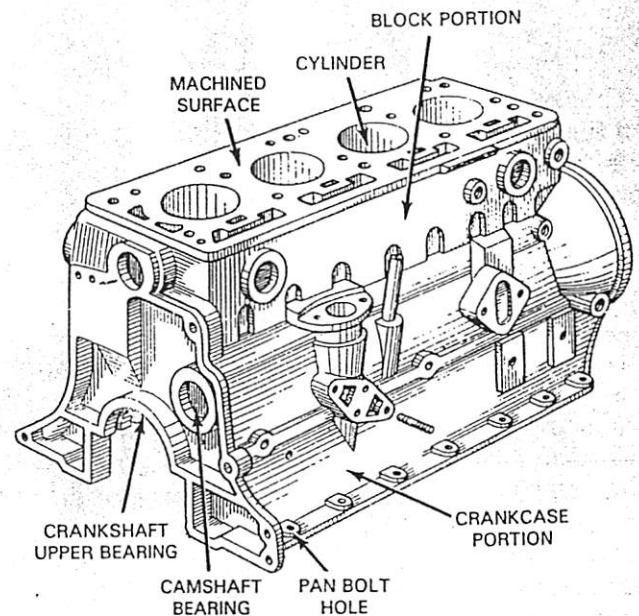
Typical block construction for a four cylinder valve-in-head engine. (Nissan)
